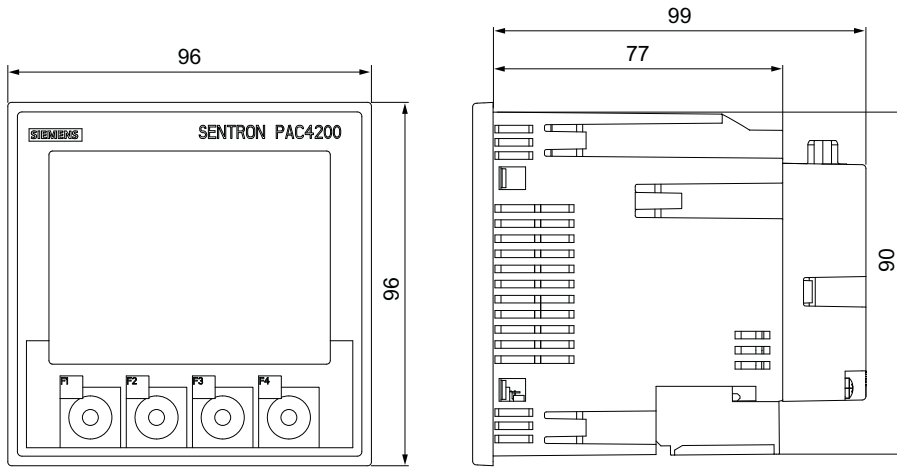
Frame dimensions with optional PAC PROFIBUS DP expansion module connected, device with screw terminals
